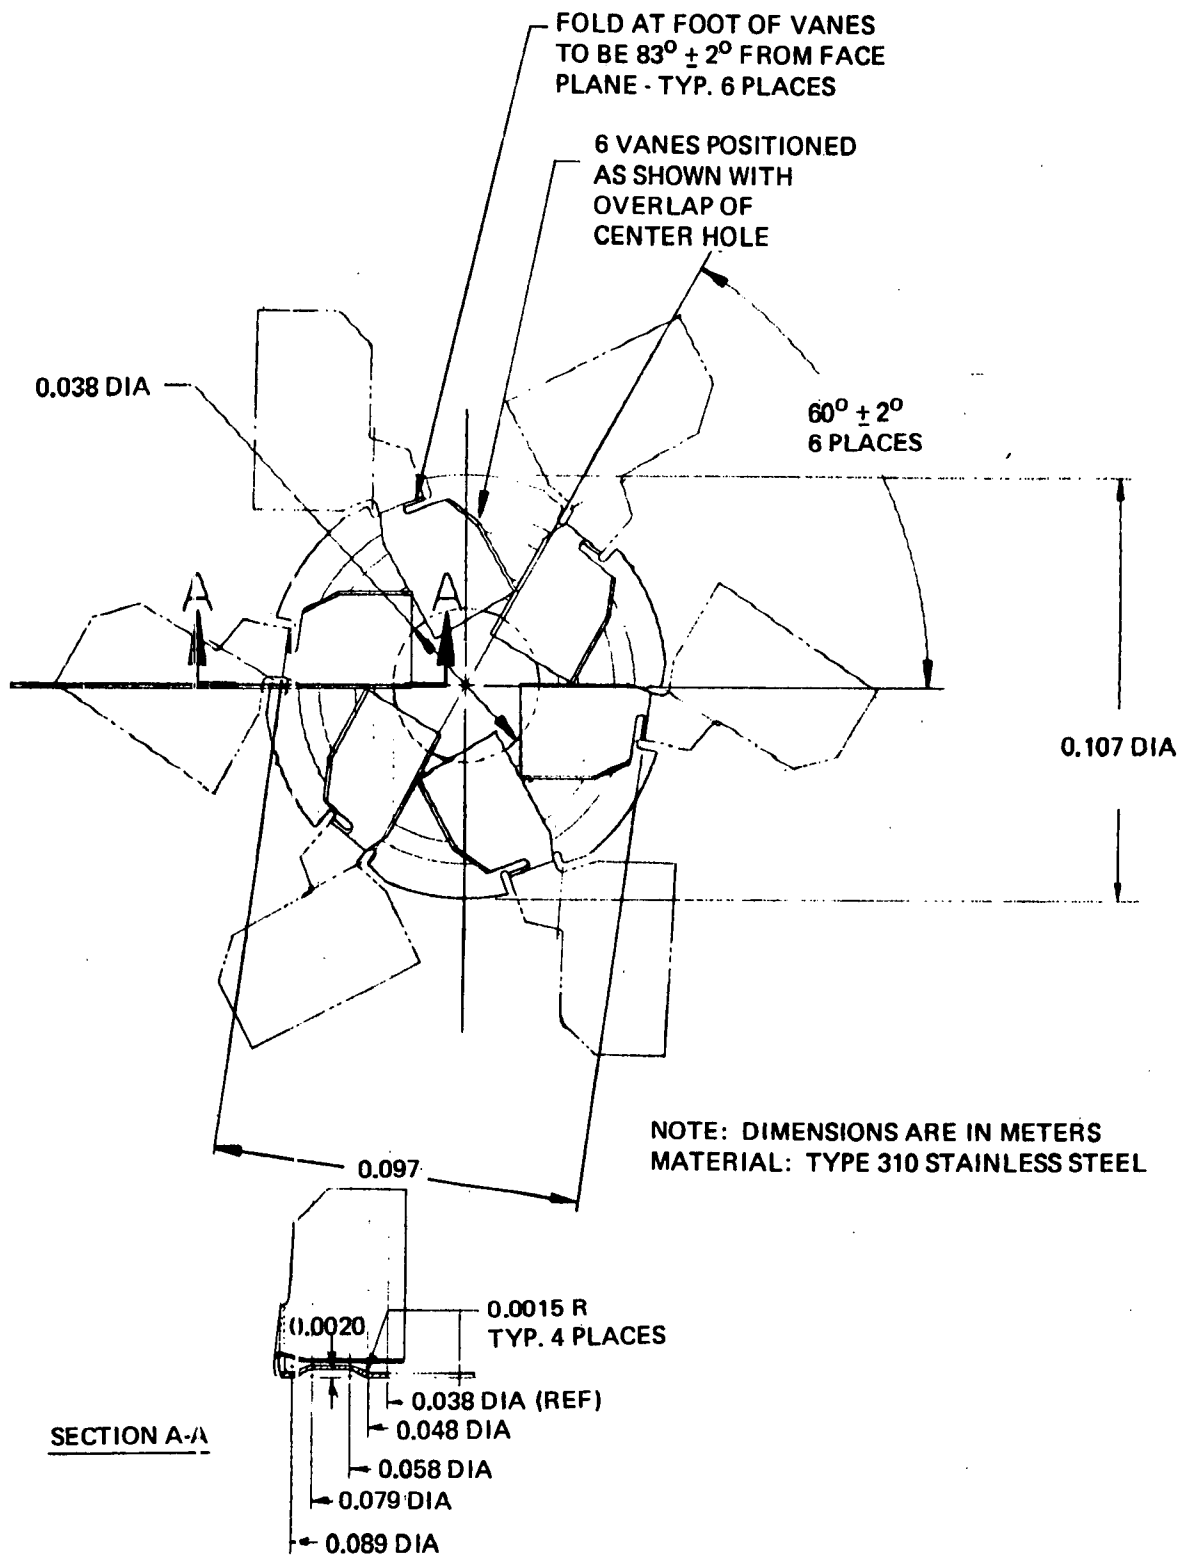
Second prototype optimum burner head design with a modified choke plate configuration
